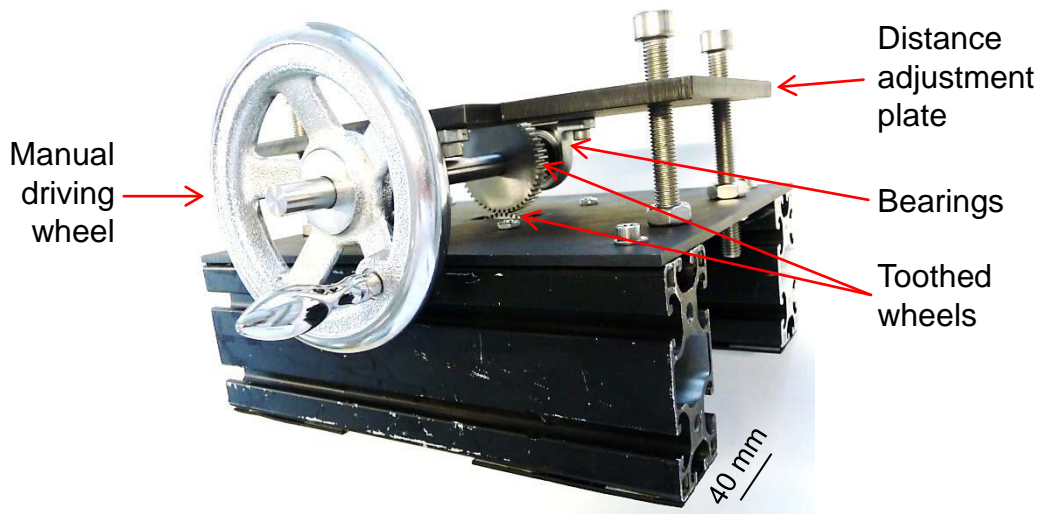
Photograph of Machine 2 to test wave-shaping using Method 3 (toothed wheel + toothed wheel).
